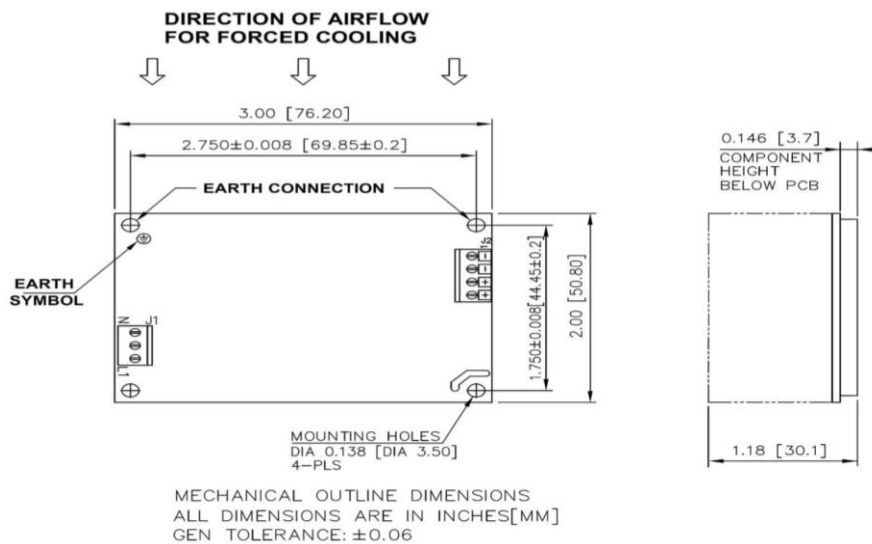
Mechanical Drawing - Screw Terminal (Option 1)
